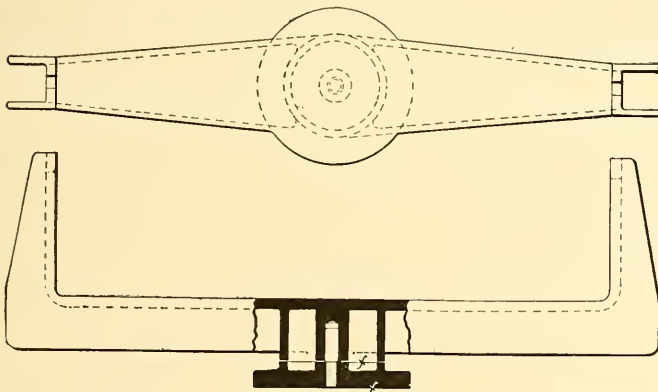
Details of Swing Support for Manifold Welding Fixture.
